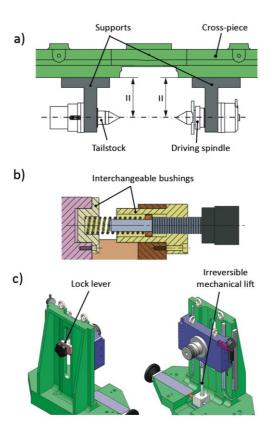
Examples of the principles of robust design: a) Duplicate machining of the driving-spindle and tailstock supports; b) Interchangeable bushings to vary the sizes of spring of the double-flank test elastic system; c) Fail-safe locking mechanism to guarantee correct positioning
